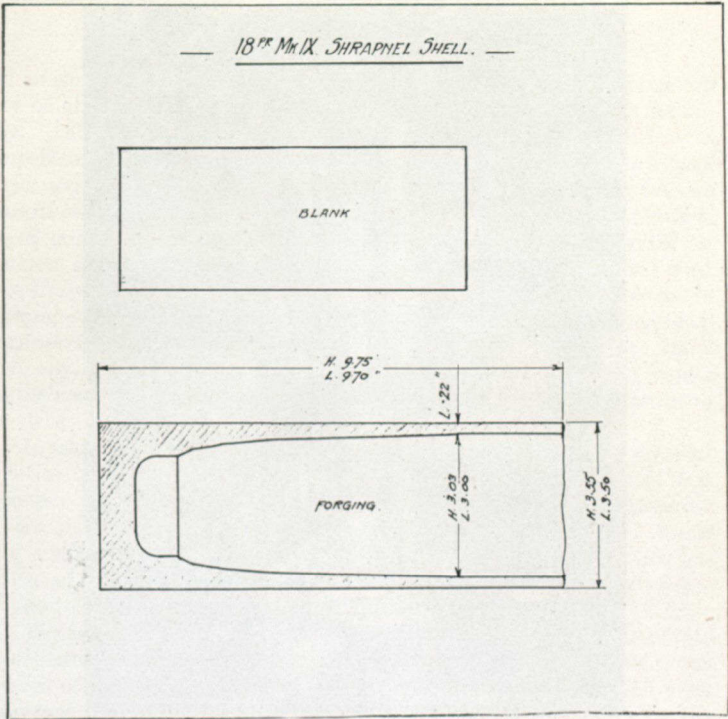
18 Pr Shrapnel Steel Blank and Forging.
